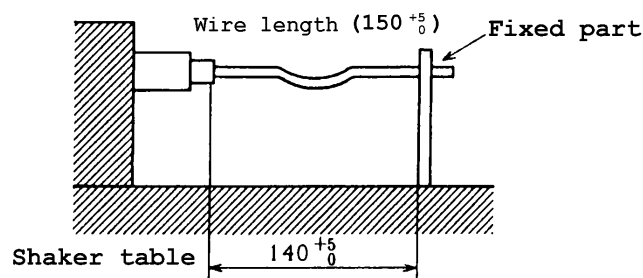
For Connectors for Direct Mounting on PCB (Unit: mm)
